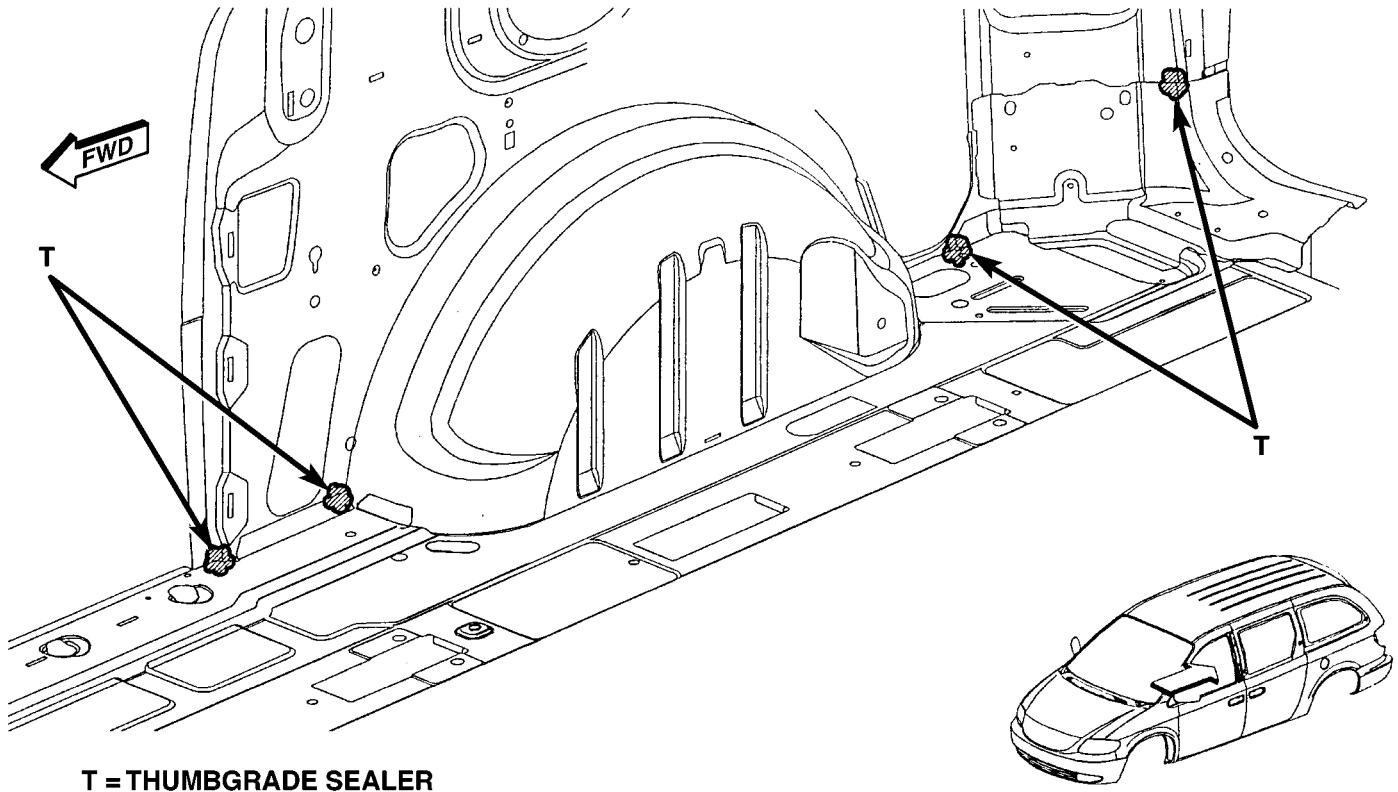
REAR WHEEL HOUSE FLOOR PAN - LEFT AND RIGHT SIDES
